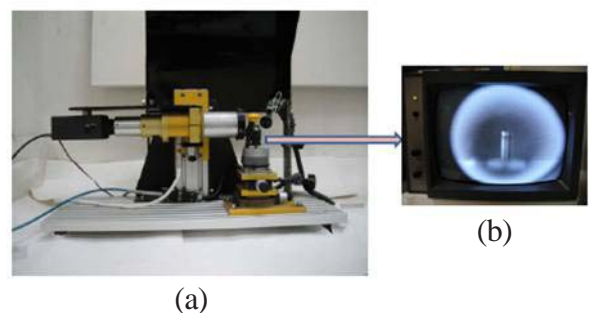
Encapsulation of ¹²⁵I source in titanium capsule using Nd:YAG laser welding technique (a) Nd:YAG laser welding set-up (b) Magnified view of sample under welding.
